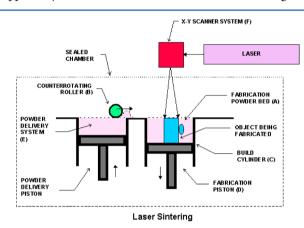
Principal elements of a laser sintering or laser melting machine; powder is spread in thin layers from the supply tank to the build tank, then fused to the part by a powerful IR laser.
